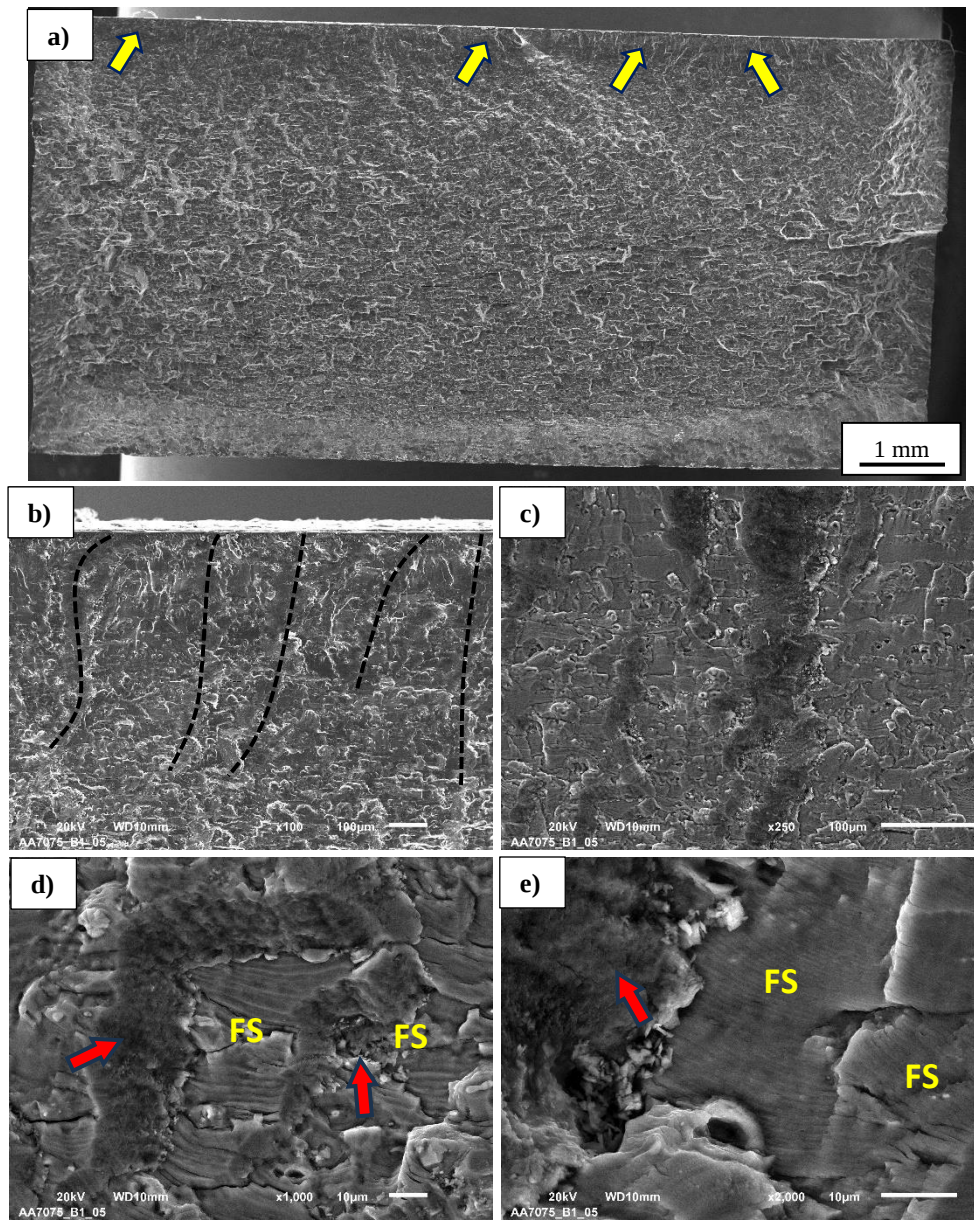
The fracture surface of UWFSW joints subjected to a load $\epsilon_{ac}=0.5\%$; general view (a), crack initiation site (b), bands with aluminum oxide (c,d), magnification of fatigue striations close to the oxide-containing bands (e)
